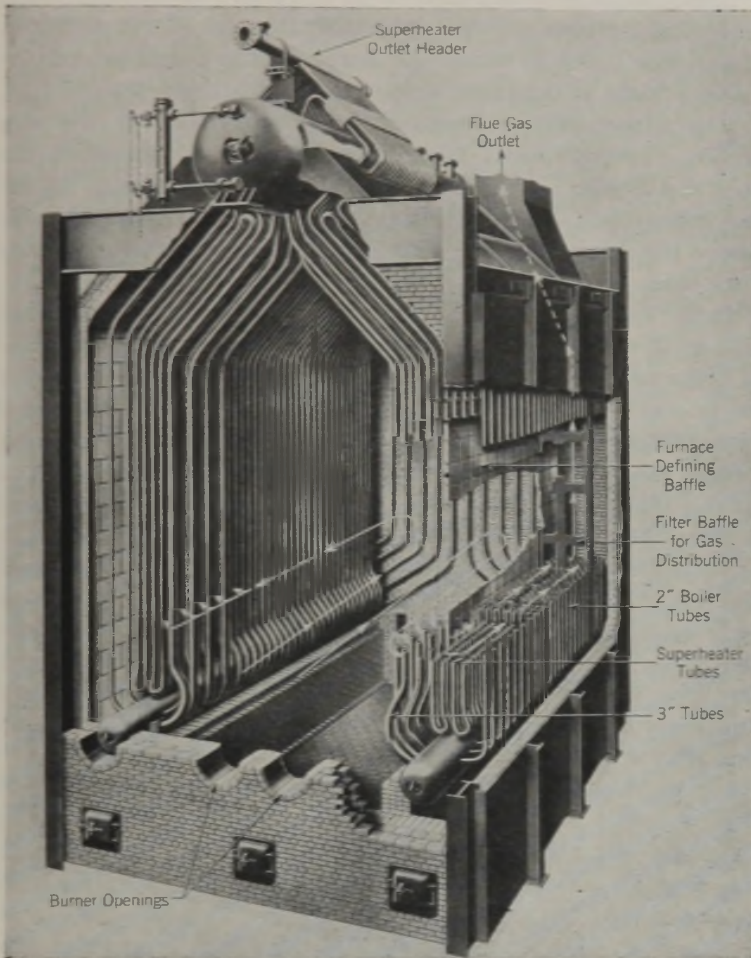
Foster-Wheeler "S-A" boiler arranged for reverse firing.
